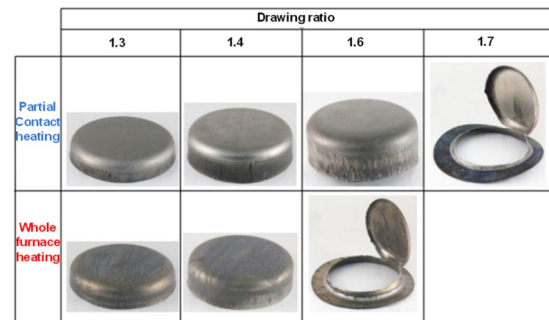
Cylindrical deep drawing by partial contact heating and whole furnace heating [65]
